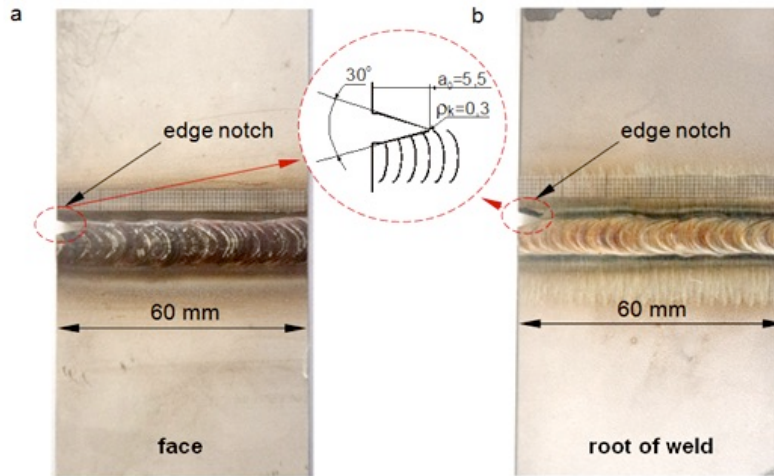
A view of the specimen with an edge notch welded with GTAW method from the face side (a) and root of weld side (b)
